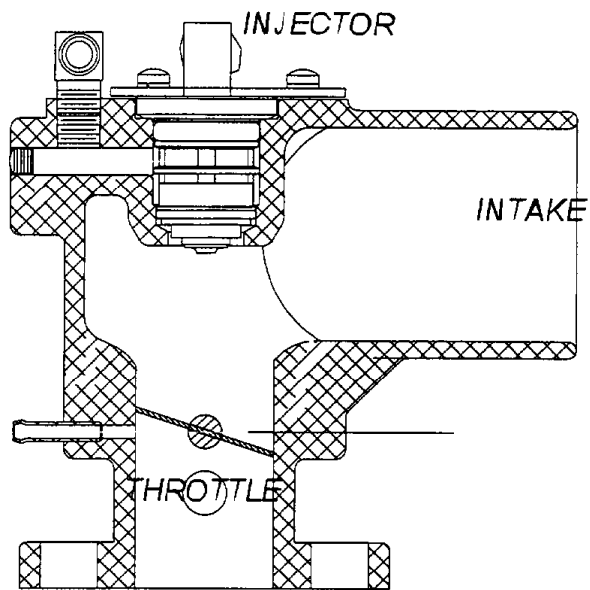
is a photograph of the throttle body. Figure 16 is a cutaway drawing of the throttle body viewed along the axis of the throttle shaft, which is in the lower portion of the figure. Air intake is from the right of the figure, and the fuel injector is at the center top. Figure 17 is a cutaway drawing of the lower portion of the throttle body viewed perpendicular to the throttle shaft from behind the air intake. The figure shows the throttle actuator at lower right, the fuel pressure regulator at upper right, and the throttle plate at lower left.
